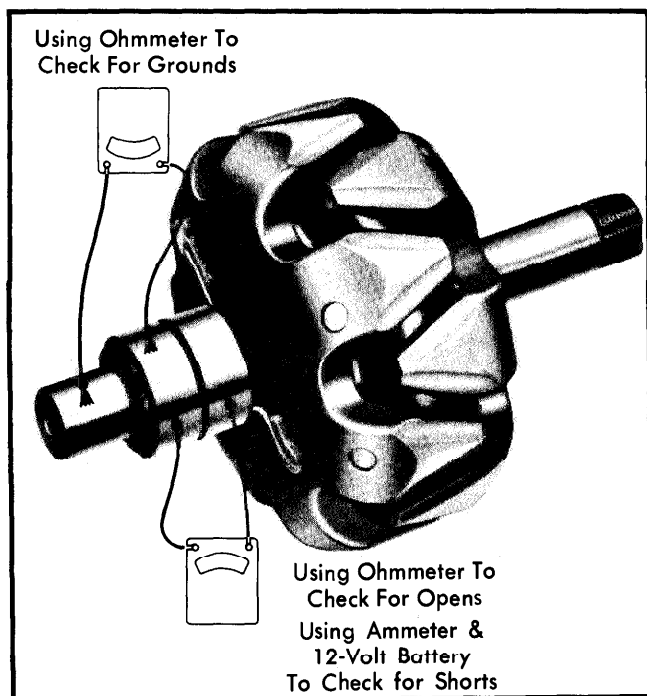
Bench Testing Rotor for Opens, Shorts and Grounds
